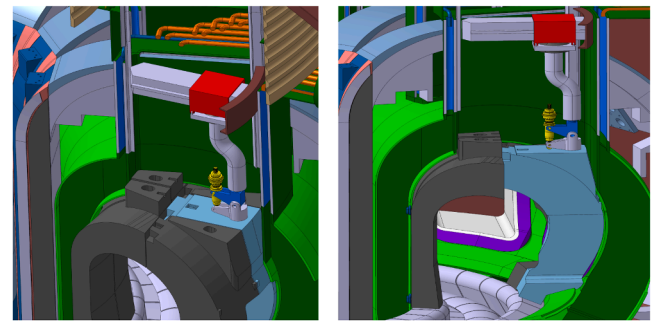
Left: Blanket segment gripping; Right: Triangular support unlock.
